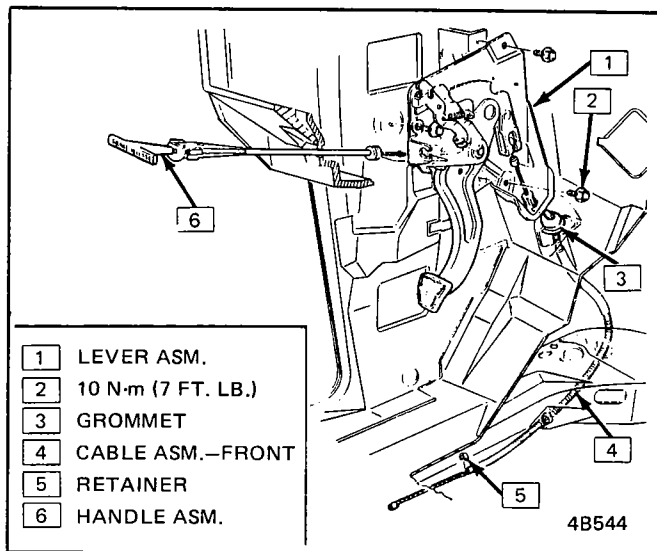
Parking Brake Release Handle & Control Assembly-G Carline
